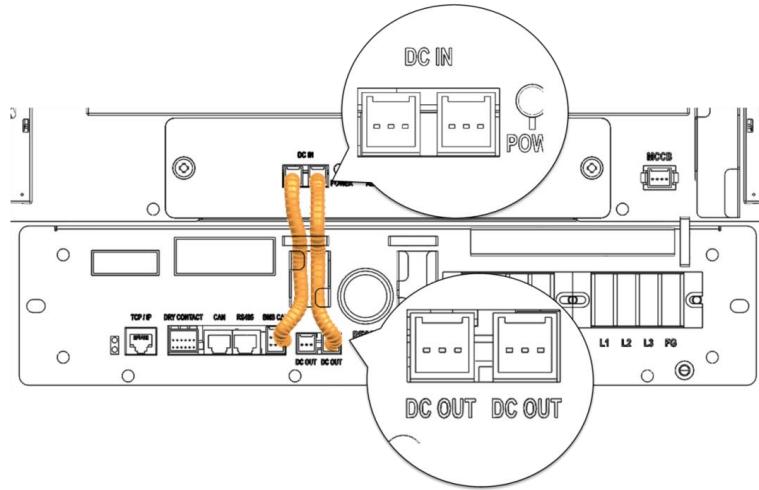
DC Power Cables from SMPS Assembly Type A to SMU
